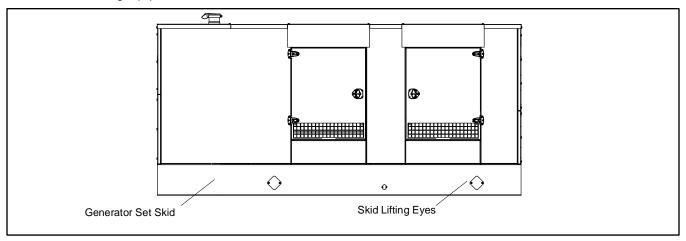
Typical Enclosure Attached Directly to the Generator Set Skid
